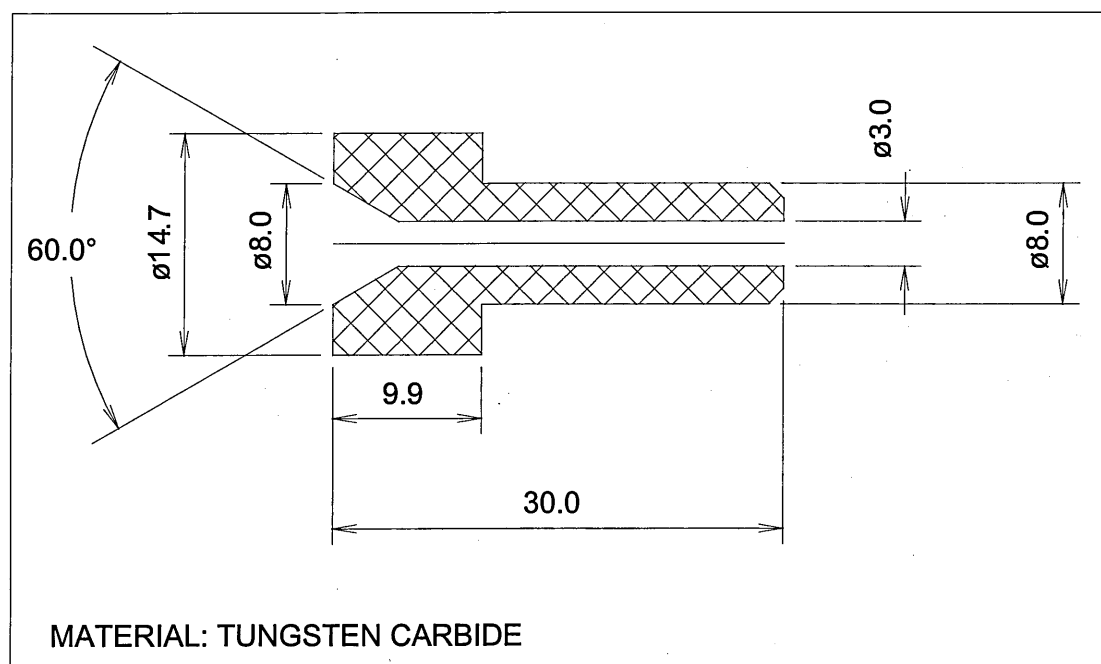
A STANDARD DIAJET NOZZLE
